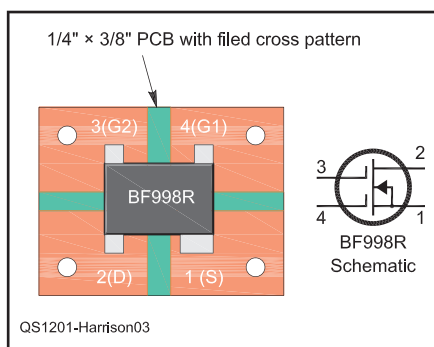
Drawing of mounting method for the BF998R MOSFET on the mounting substrate.
